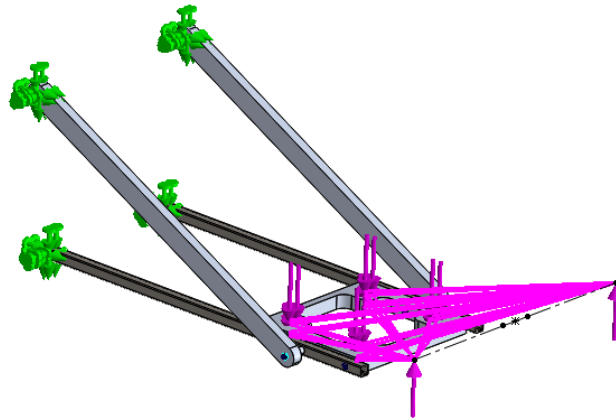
FEA assembly screenshot highlighting connection points, applied loads, and suppressed components.
